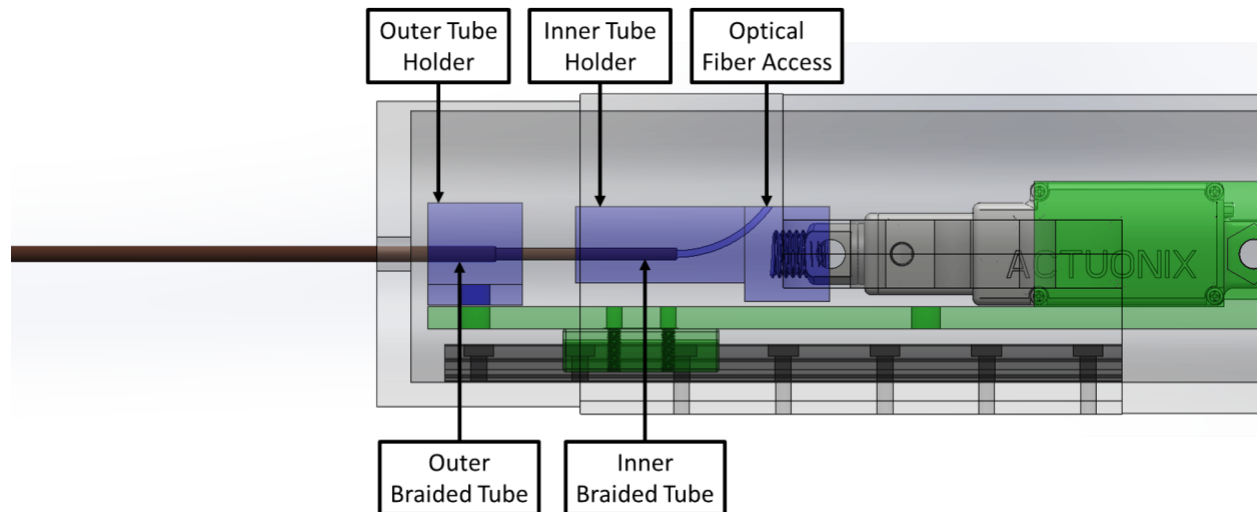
Cross-sectional view of braided tubes and actuation unit.
